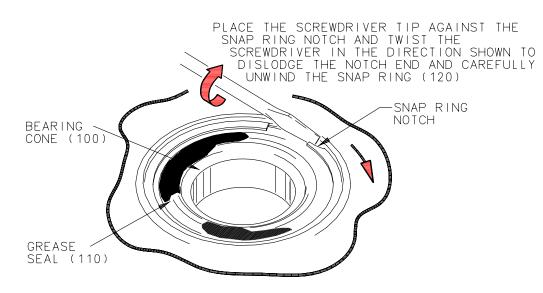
Snap Ring Removal – Inboard Wheel Half Shown
